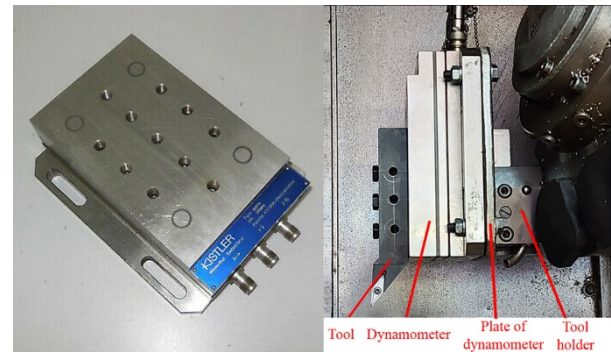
a) The 3-axis Kistler 9257A dynamometer, b) specially designed holder of dynamometer
